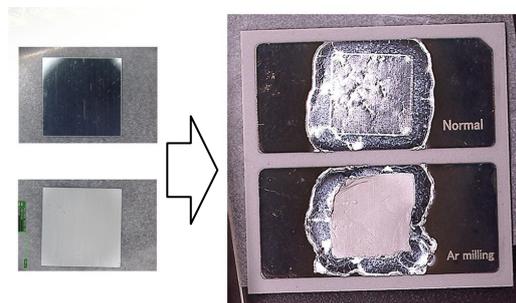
Solder condition before and after reflow. (upper: without preprocessing, lower: with Ar milling)
